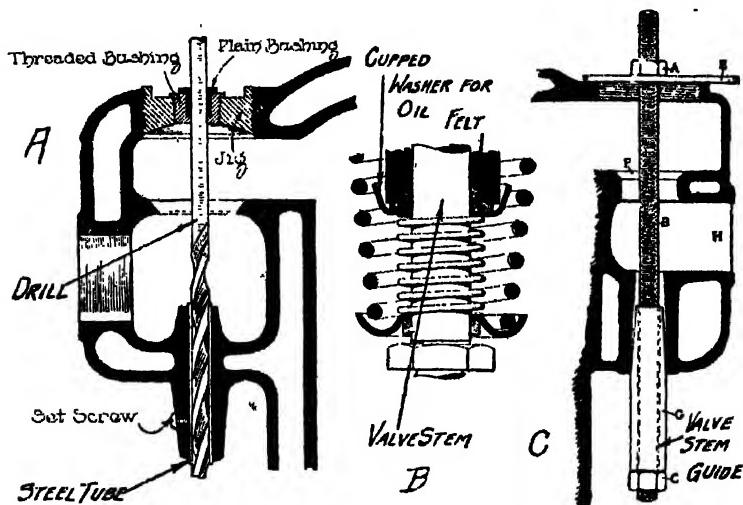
Practical Methods of Restoring Worn Valve Stem Guide Bushing.
